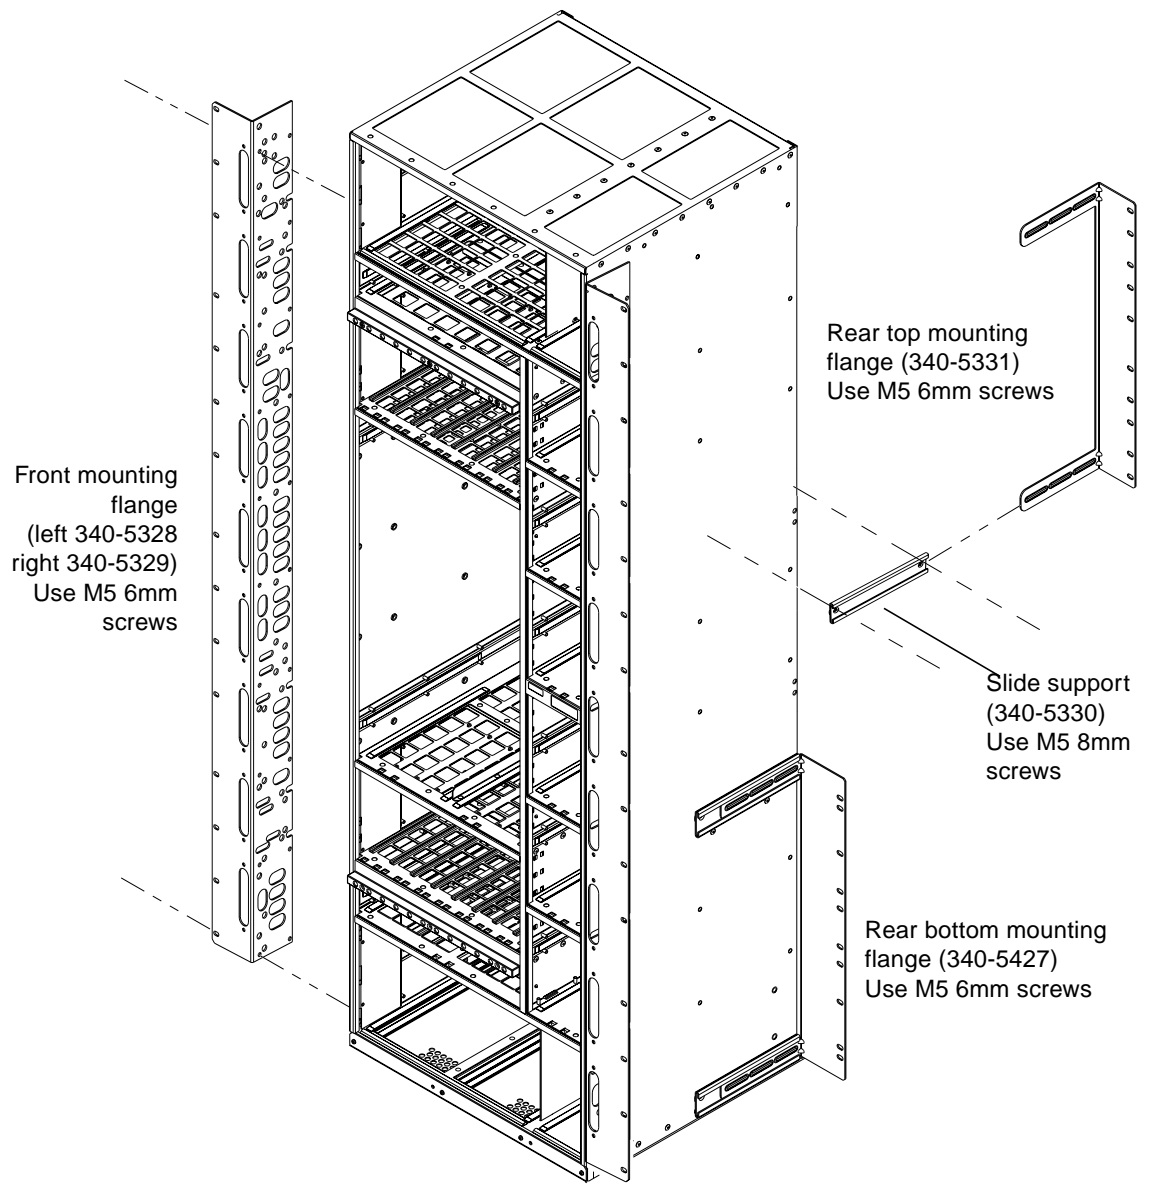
600-mm Rack Mounting Flange Kit
